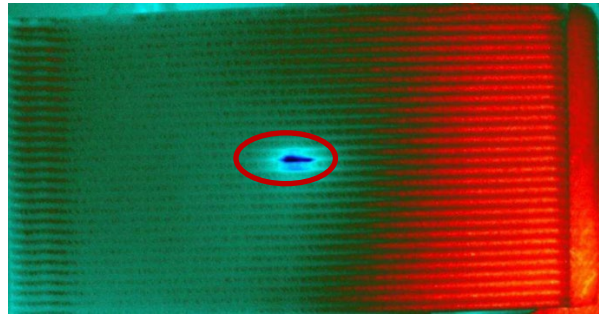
IR image of 3D printed sample 3 with the nozzle located 6 mm below the defect and the shop air flow on (defect circled in red)
